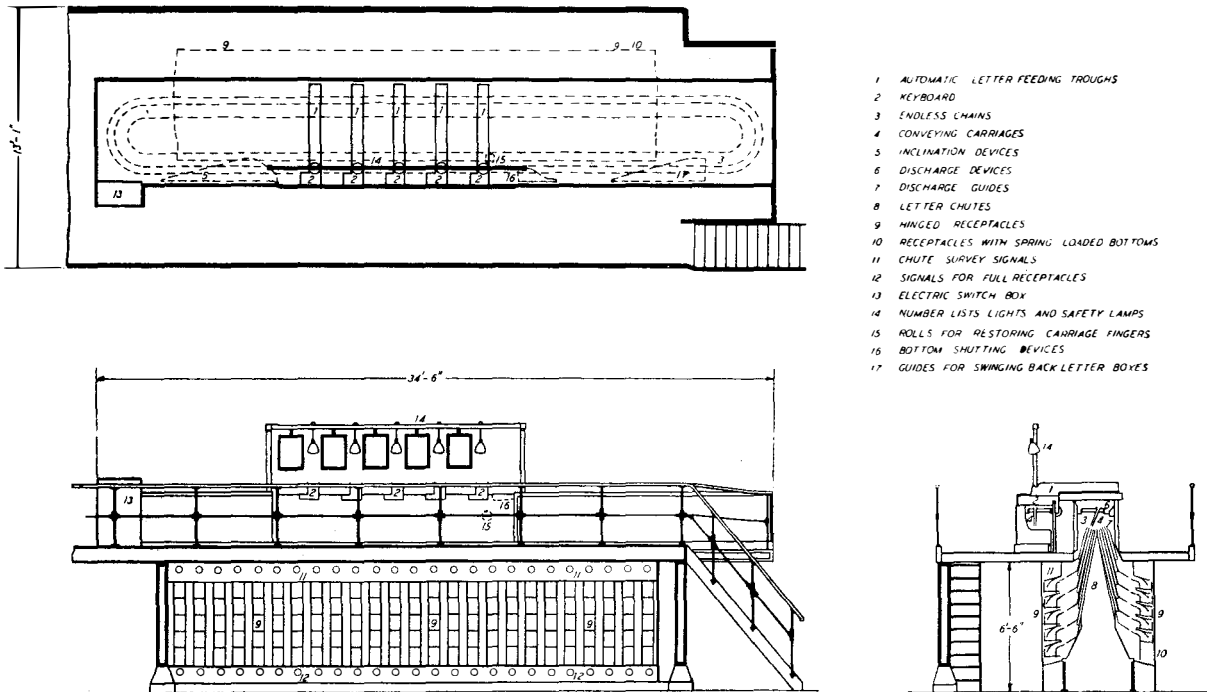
GENERAL LAY-OUT OF ONE MACHINE.
